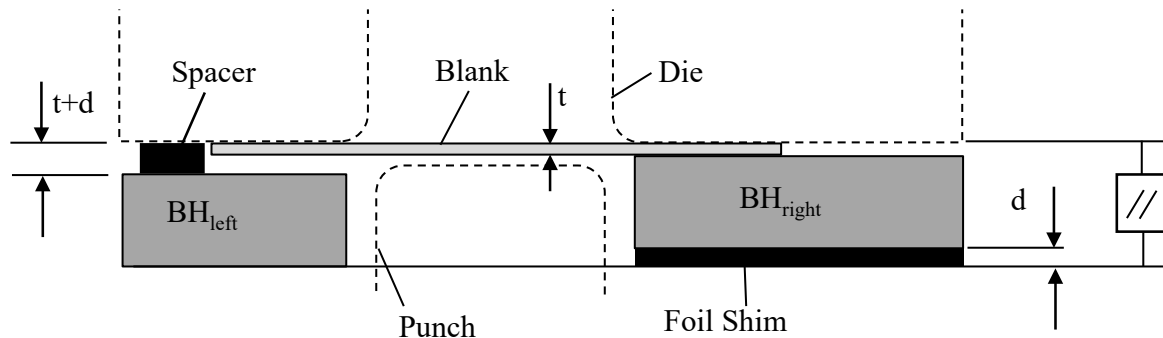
Spacer concept to ensure asymmetric blank-draw-in and reduce the tool tilt.
